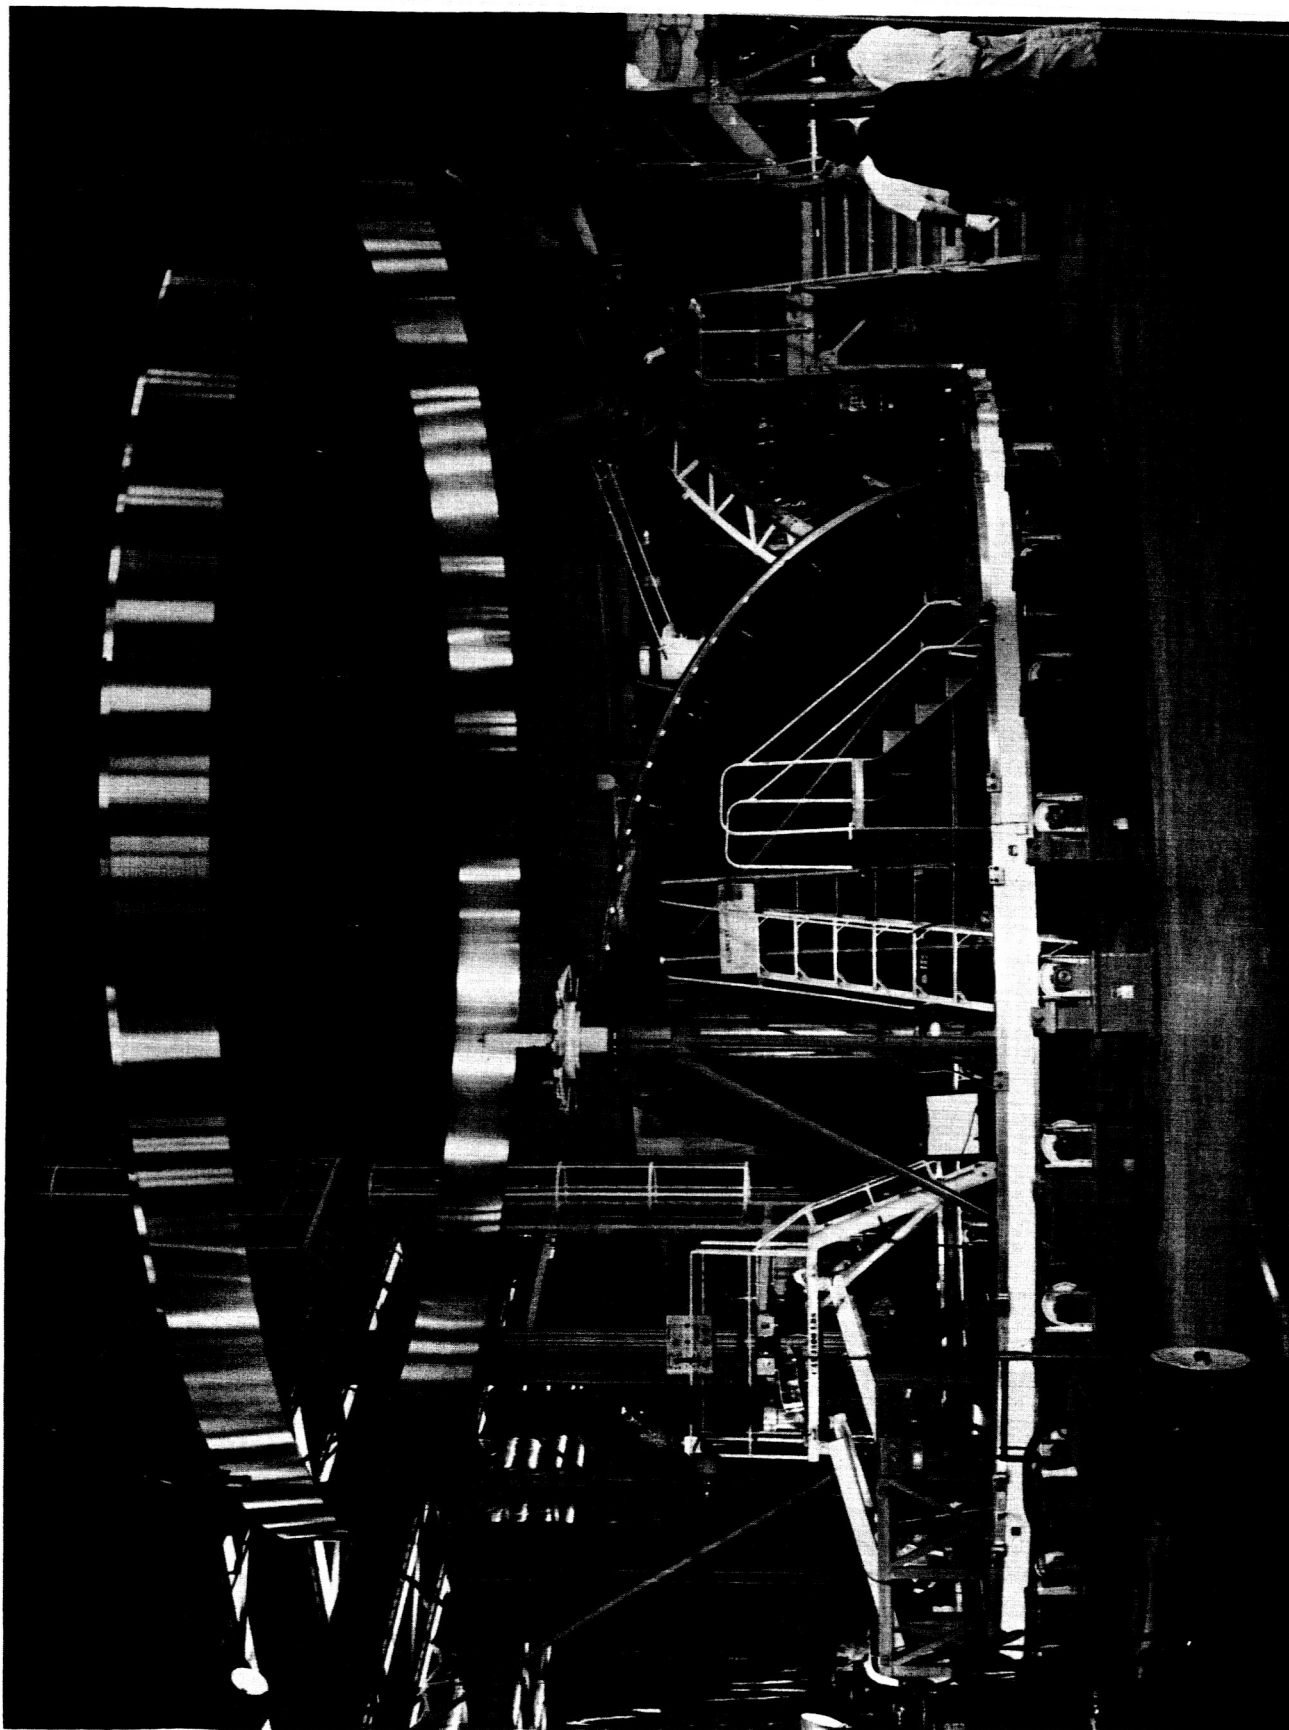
"Y" Ring Being Lowered for Welding
